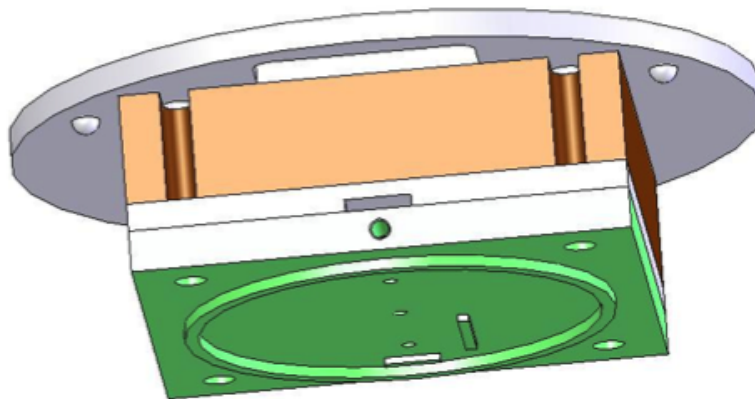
CAD model of substrate chuck, showing (from bottom to top), substrate holder with alignment ridges and sealing ring, heater, insulation block, and backing plate with kinematic coupling half-spheres.
